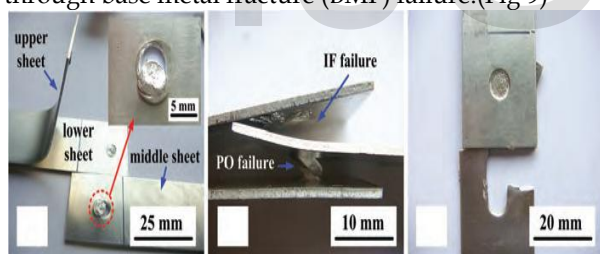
Macro/microstructures of Type III weld joints in the 1.0/1.0/1.0 mm stack that failed in A, — IF mode; B— PO mode.
